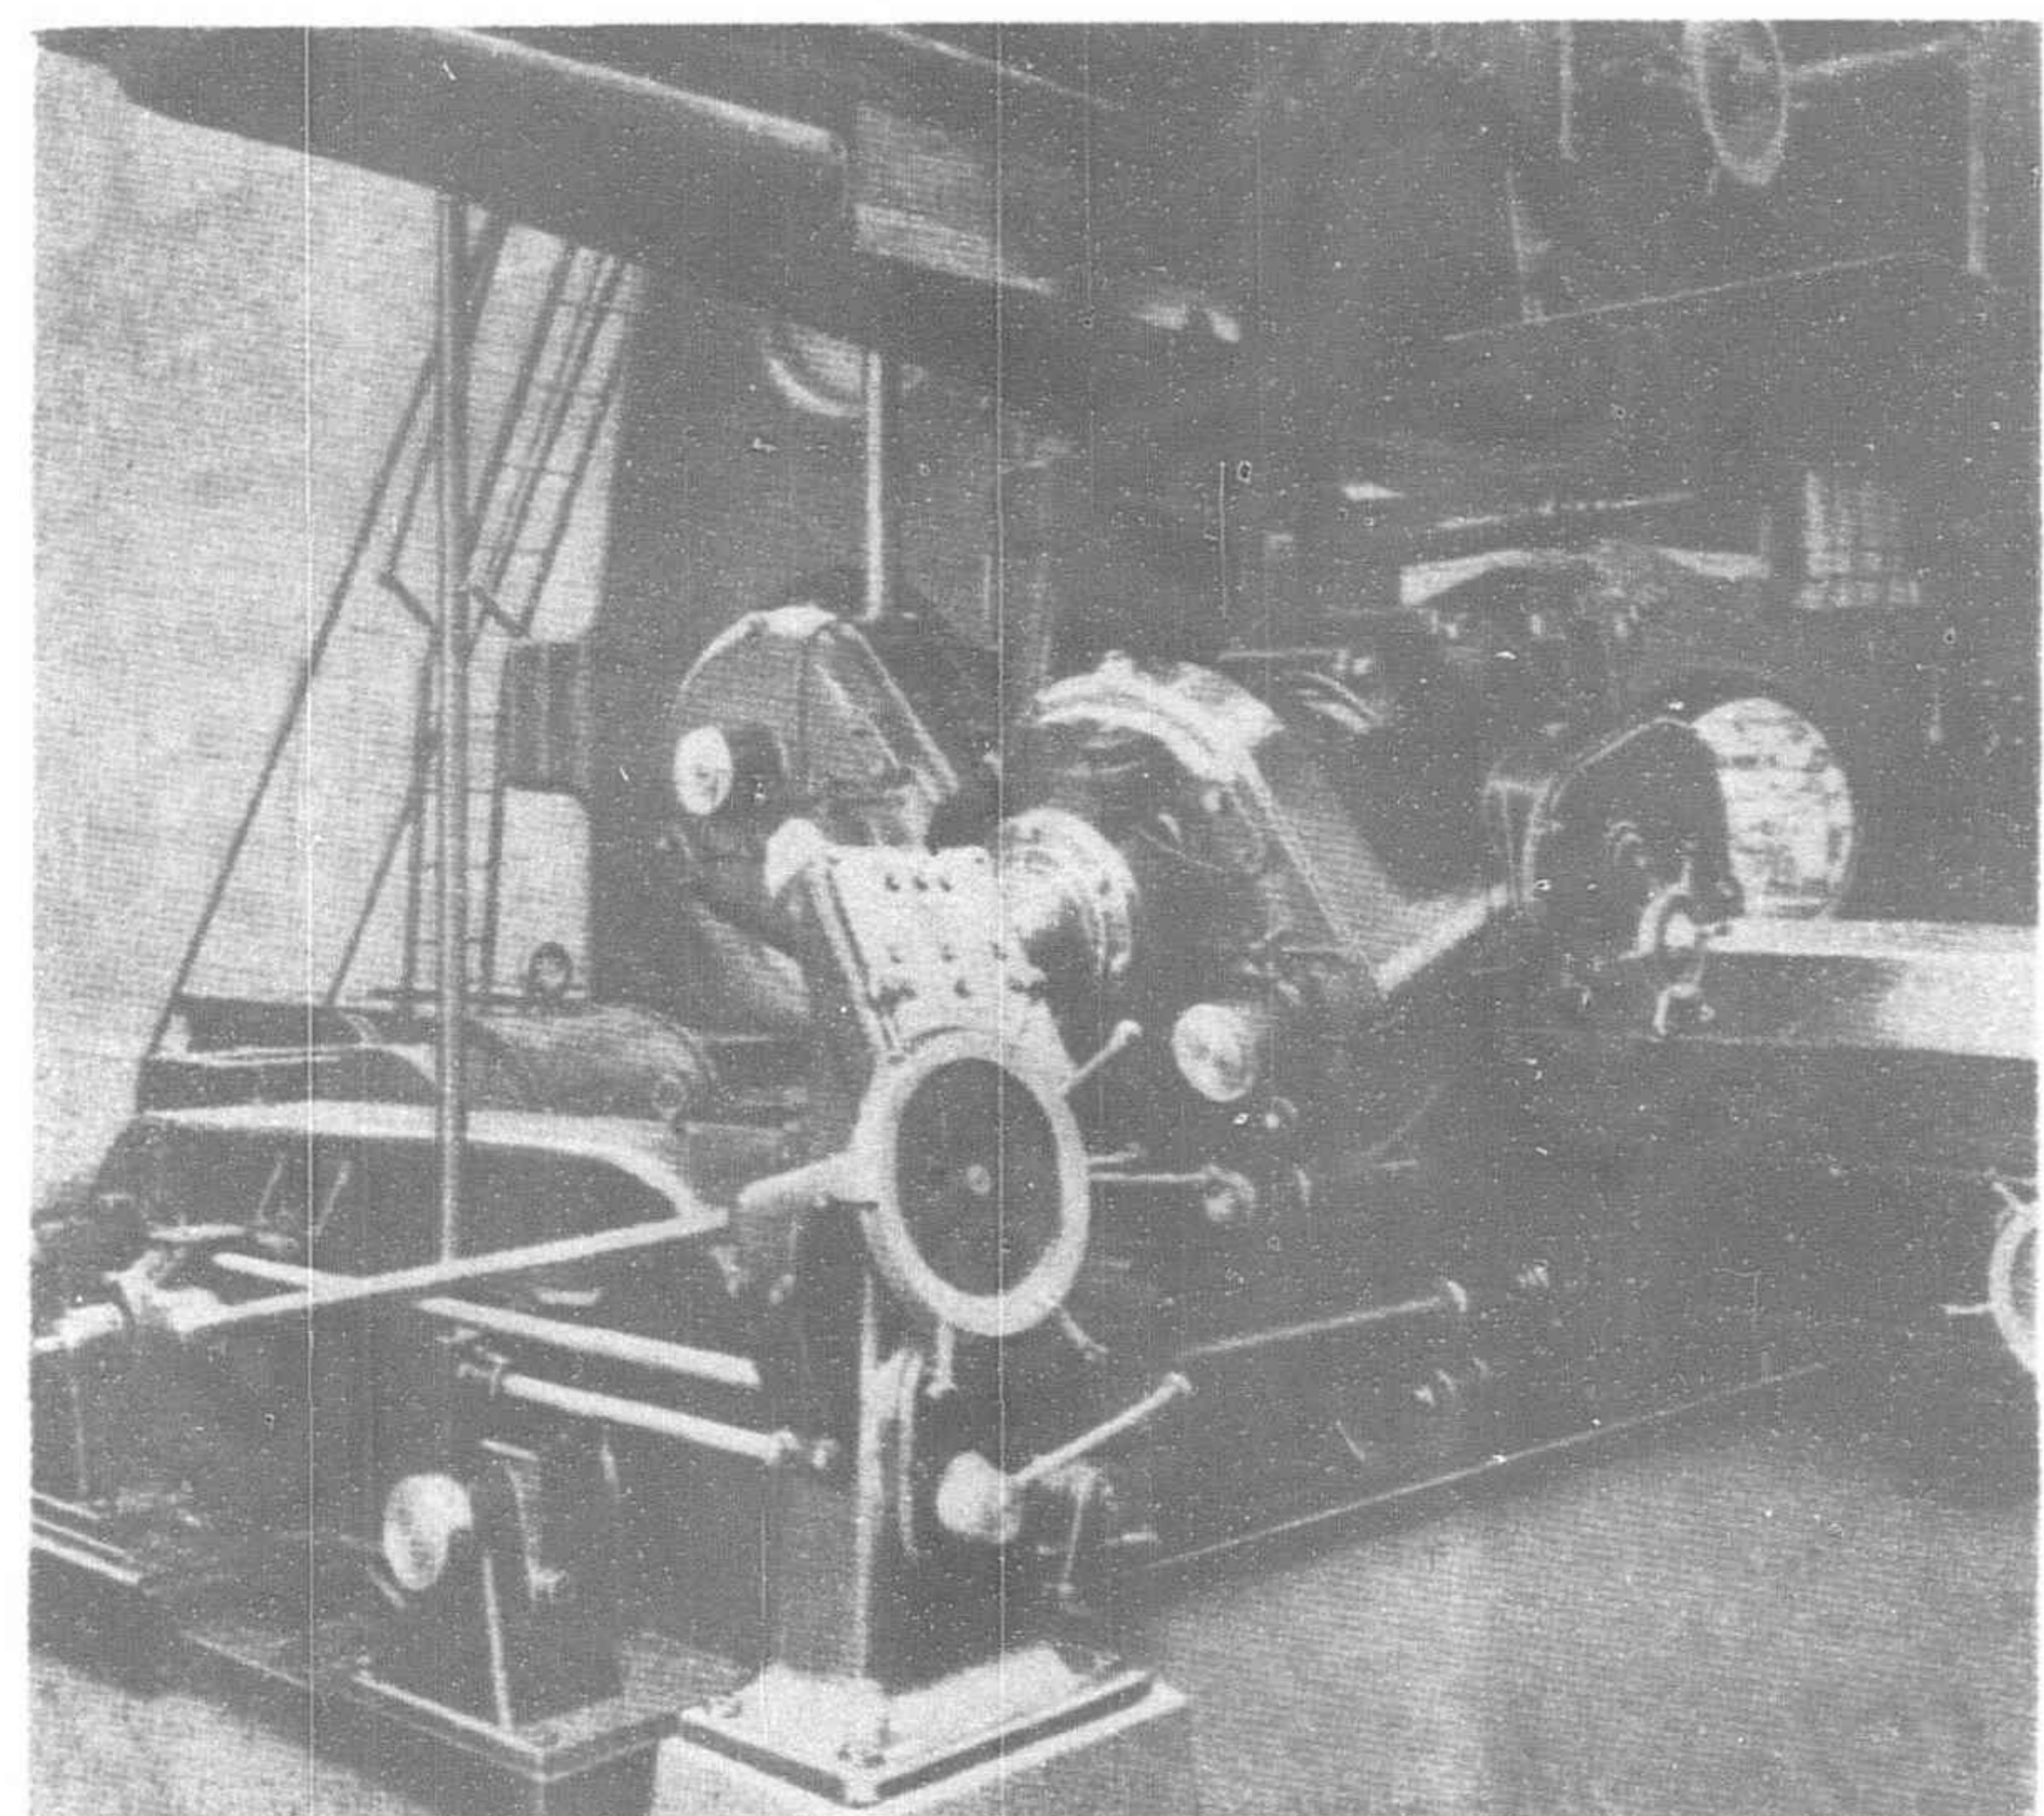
The Left Hand side of the Machine with Horizontal Saddle in an angular position. The Control Panel is also seen
